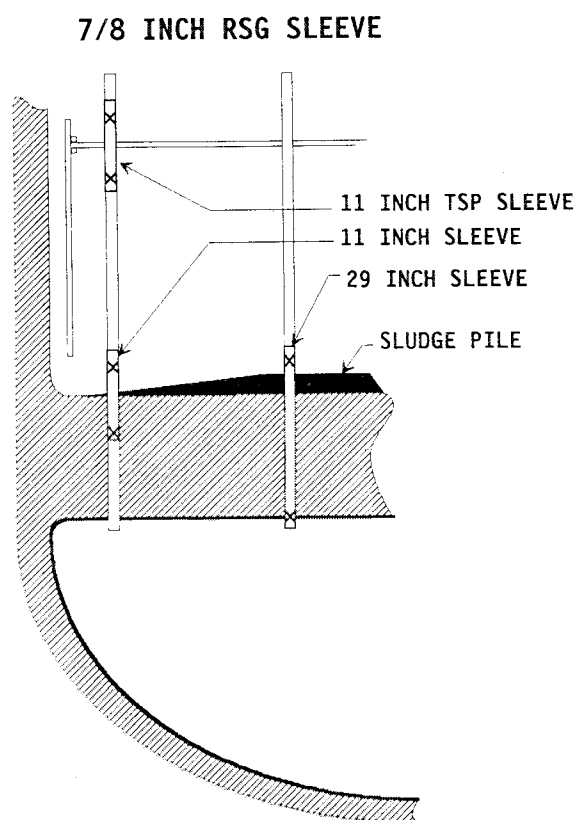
Babcock and Wilcox Welded Sleeves for Recirculating Steam Generators
